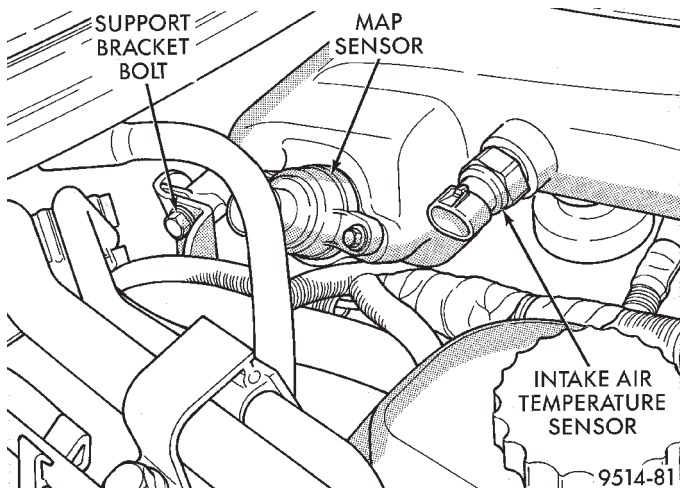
Intake Manifold Sensors and Left Manifold Support Bolt
